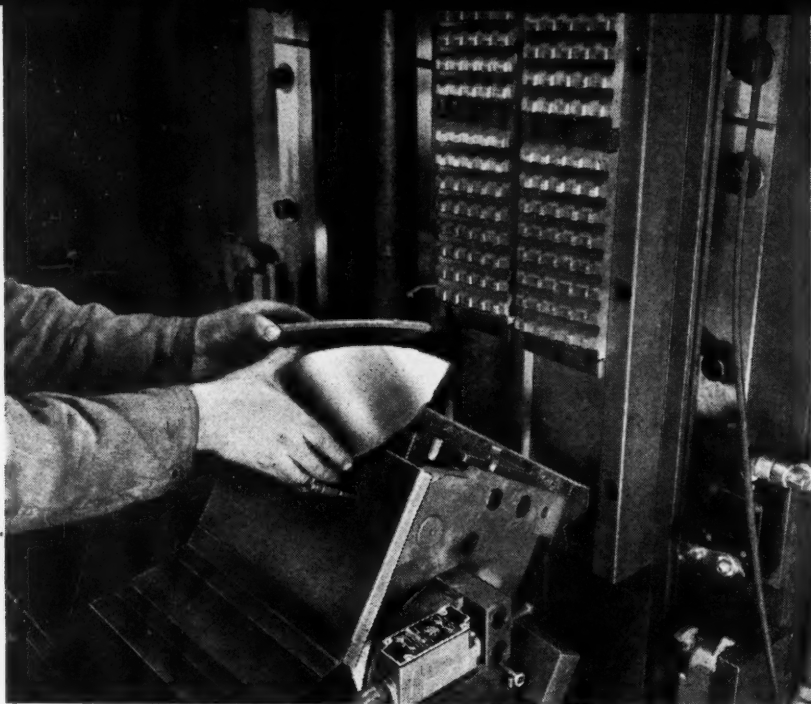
(Left) Two Electric Flat-iron Sole-plates being Loaded into the Tilting Fixture of the Broaching Machine. Two Plates in the Other Fixture have been Broached and will be Unloaded, as Seen in Heading Illustration
